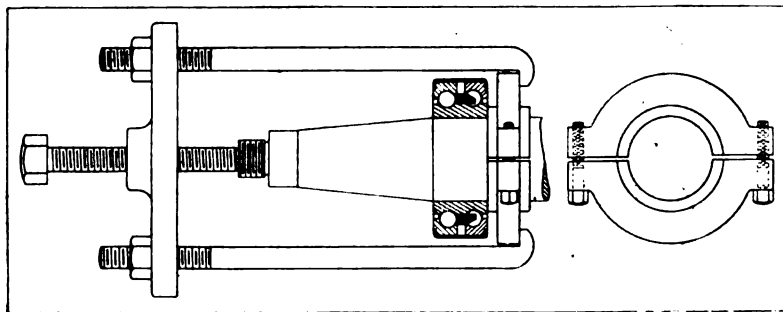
This puller is for removing complete bearings. The strain is applied to the inner bearings by a split collar placed behind
